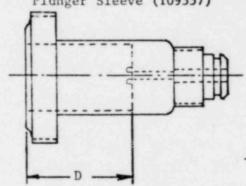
D: Sleeve Shoulder to Sleeve Backface.
